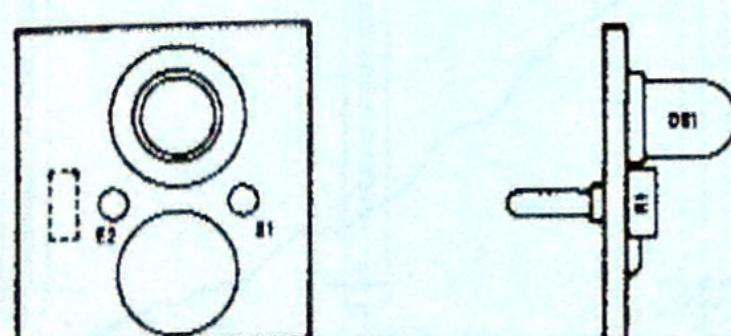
3A1A1 LED Indicator Assembly (6628-2190)
